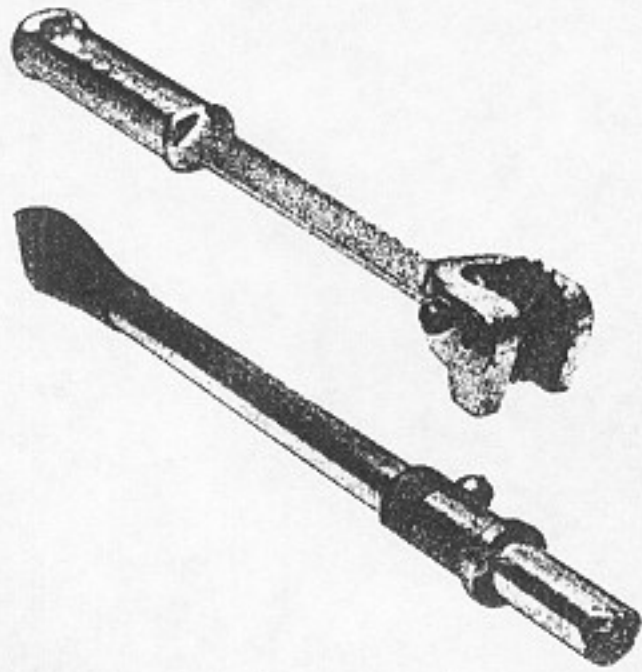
If sparks appear when you are cleaning a wheel with a mechanical dresser, it means the wheel is grinding off the teeth of the revolving cutters. If this happens, use more pressure against the face of the wheel. (a) Huntington grinding wheel dresser. (b) Diamo-Carbo grinding wheel dresser.
